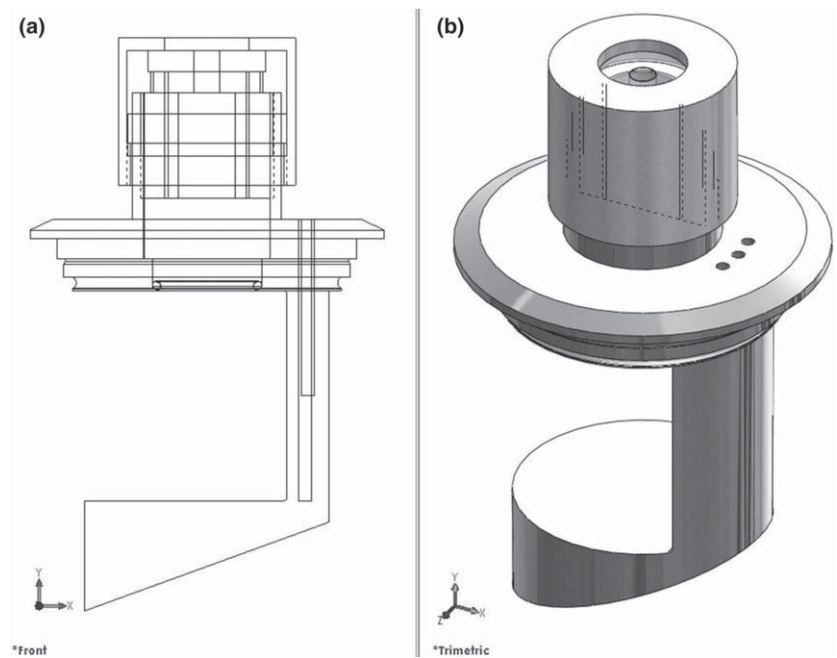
Wireframe front view (a) and trimetric shaded view of the sensor design (b), showing the bore holes for the temperature measurements and the mounting equipment to fixate buffer and sound transducer.
